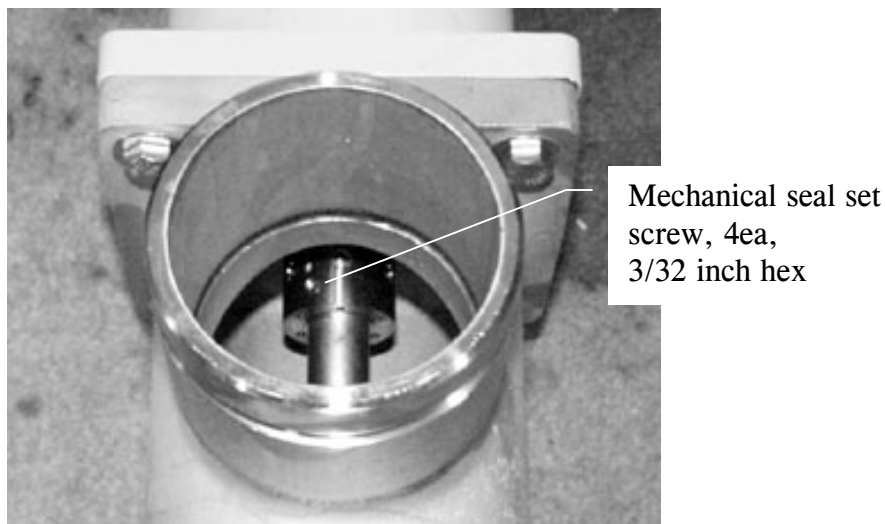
Extract Stationary Plate from Seal Plate
